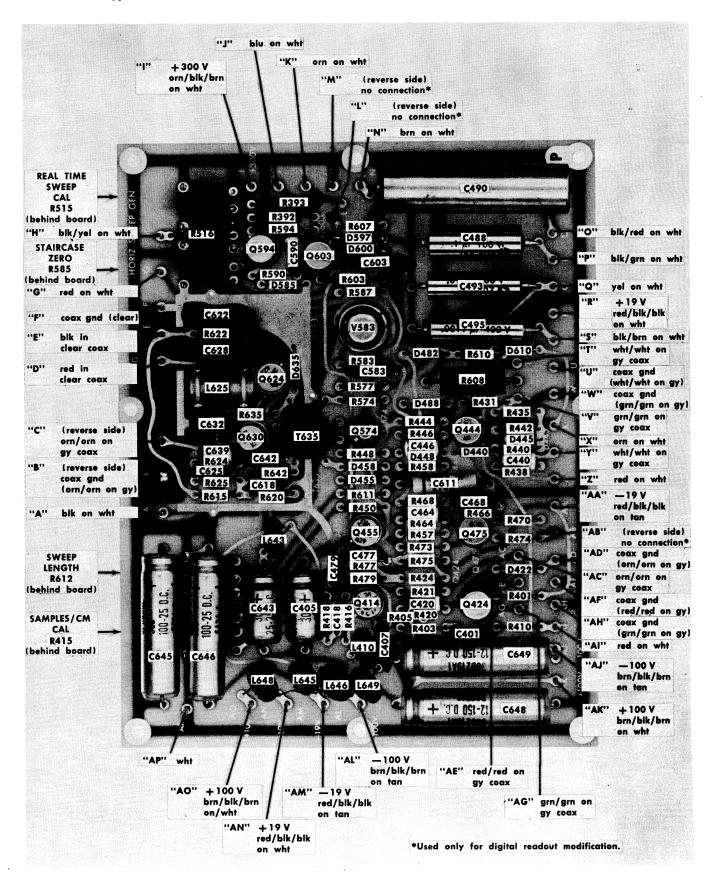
Circuit component locations and pin-connector wiring code on Horizontal Sweep Generator etched-wiring board.
